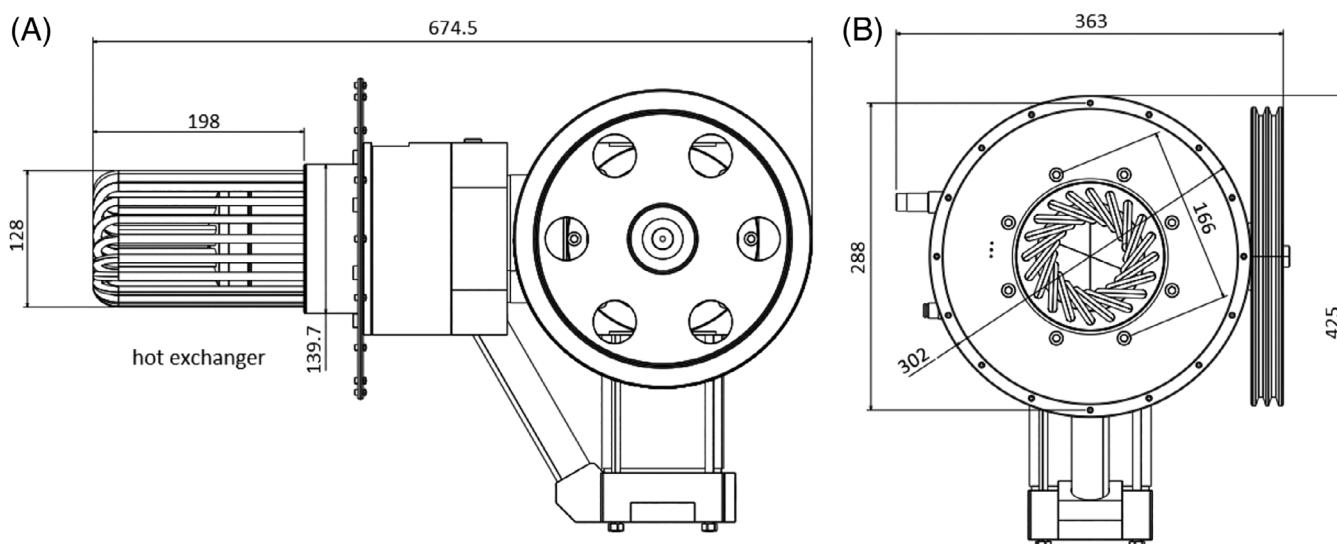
Drawings of the Stirling engine; lateral view A, frontal view B
